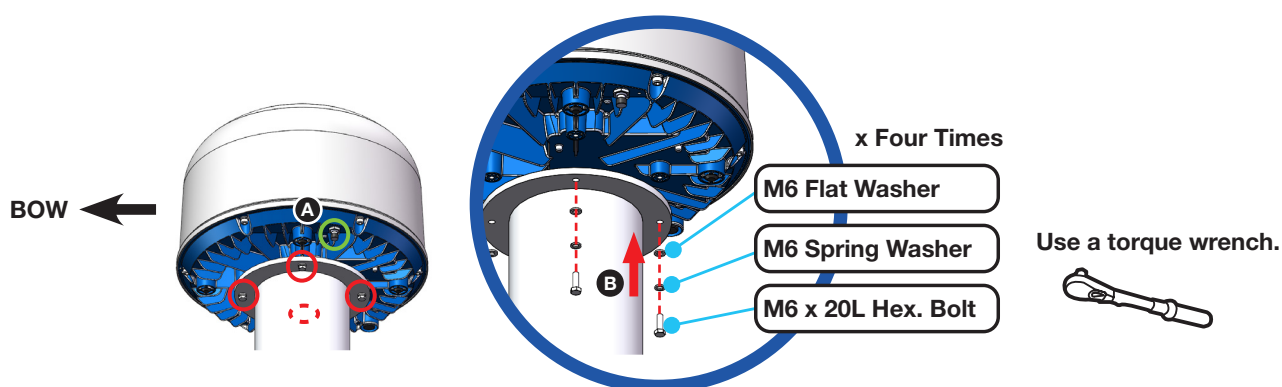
Mounting Antenna using Inner Holes (with M6 Bolts)
